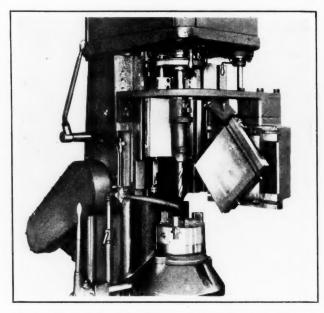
Close-up View of the Main and Supplementary Side Tool-heads
